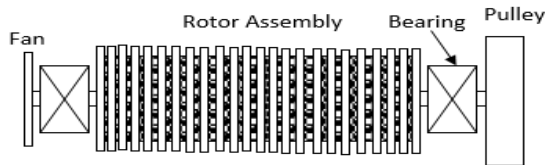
Space diagram of fan, bearing, rotor and pulley assembly for the pulverizer
